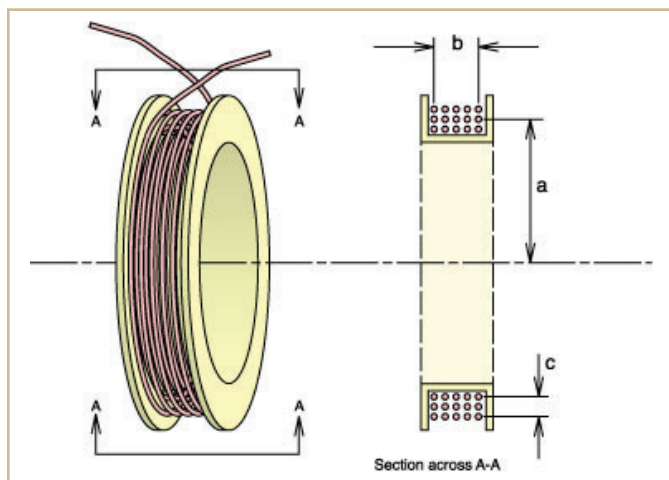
A close-up/cut-away view showing what a winding on a bobbin (wound indicator) looks like.
